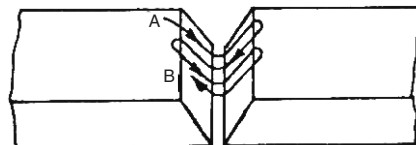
Electrode movements for a single -V butt weld.
